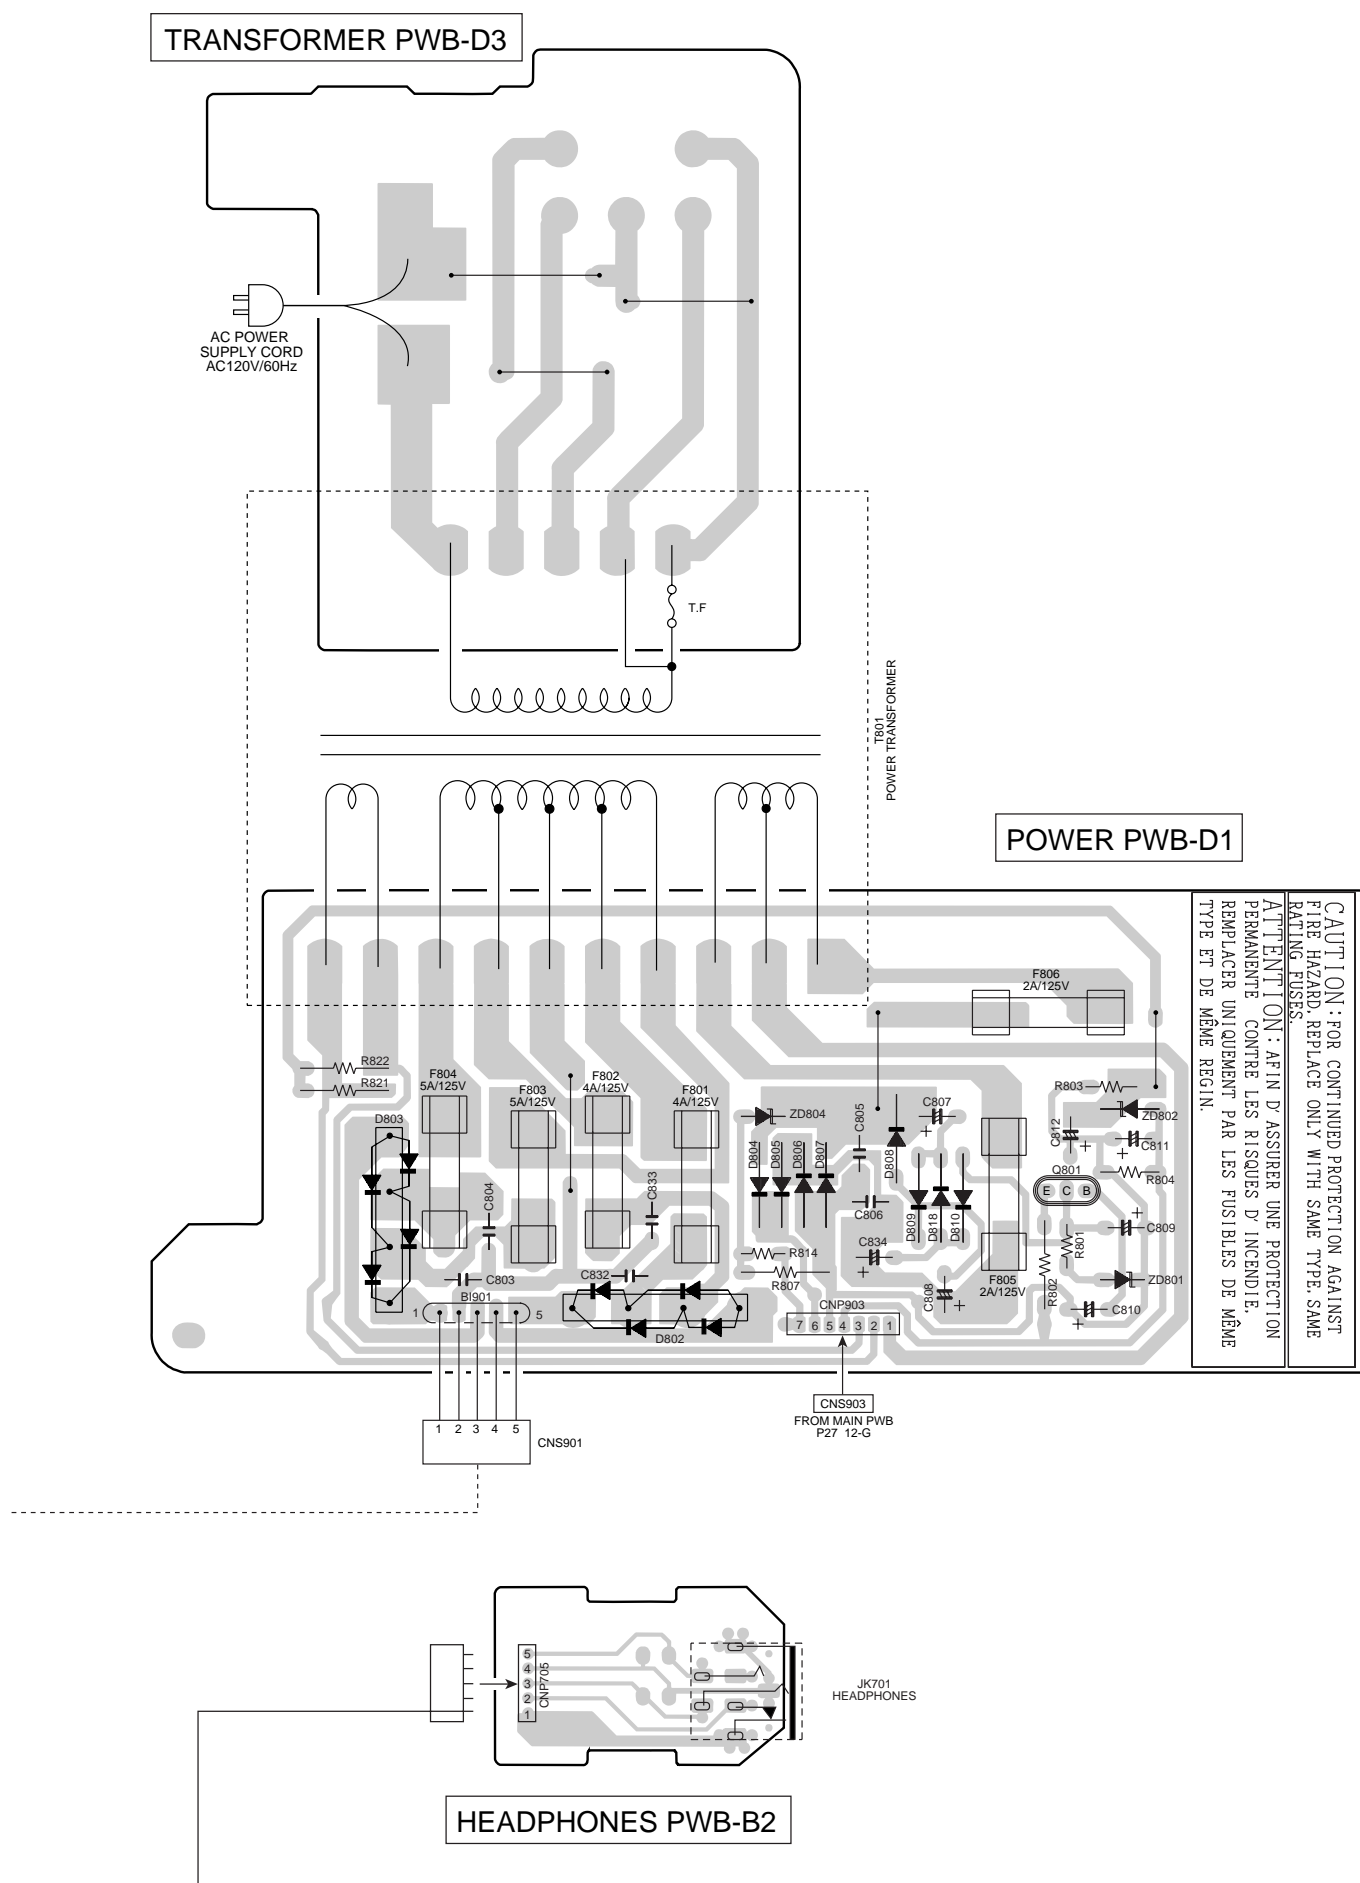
WIRING SIDE OF P.W.BOARD (6/8)
